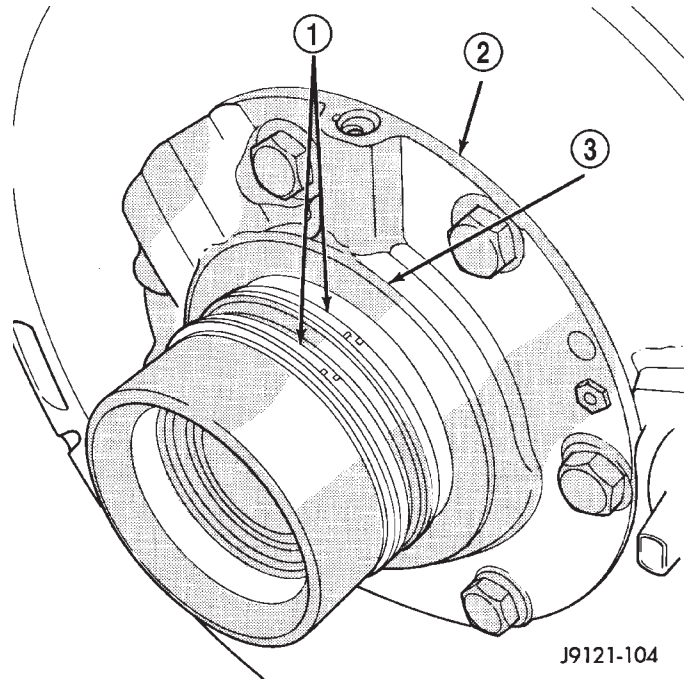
Reaction Shaft Seal Ring And Thrust Washer
